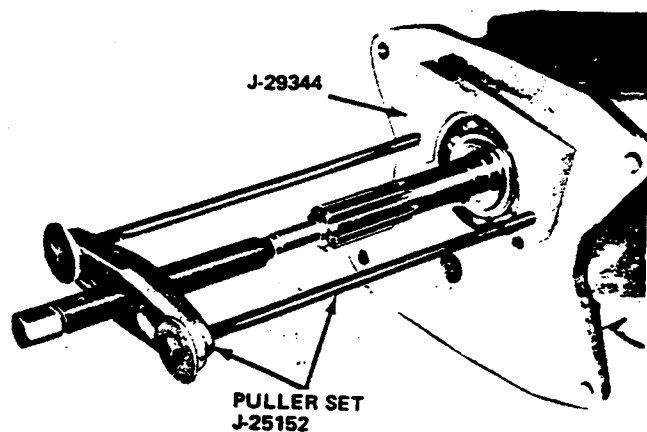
B-55 Clutch Shaft Front Bearing Removal
